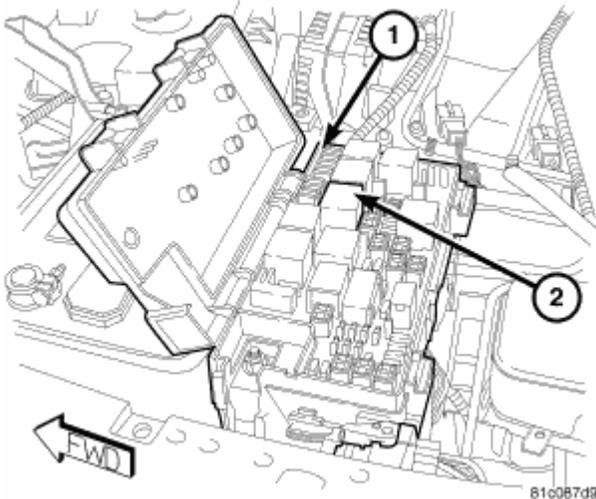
Identifying Power Module (TIPM) & EBL Relay
